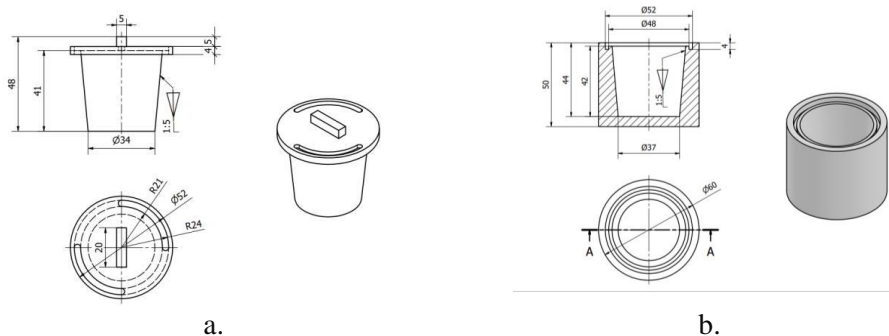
The drawing showing the execution of the mold elements used for making a coffee ground container; a. - bottom part of the mold; b. – Top part of the mold.
